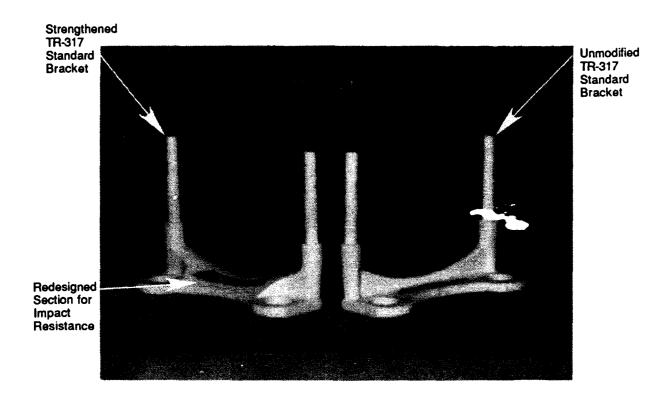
Side view of unmodified and impact modified TR-317 standard brackets
